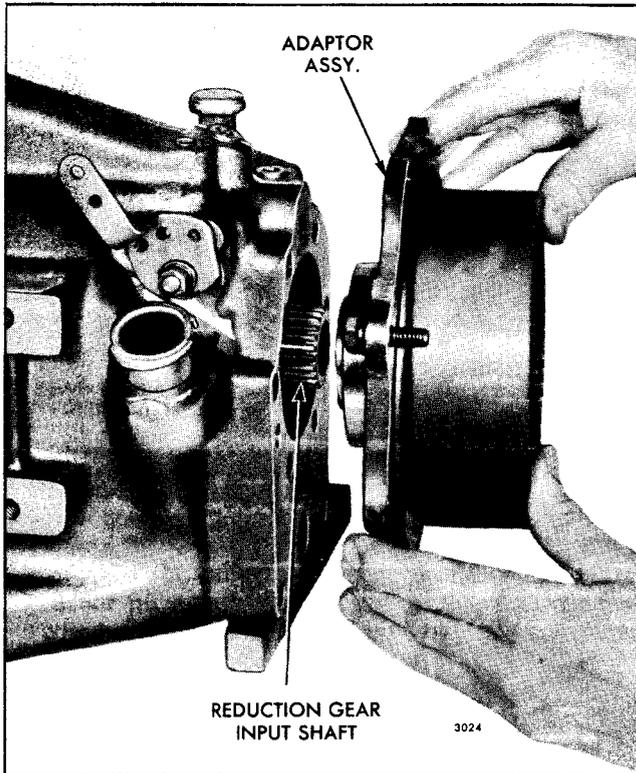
Installing Reduction Gear Adaptor, Input Gear, Ring Gear and Bearing Assembly to Reverse Gear Housing (1.5:1 Ratio)
